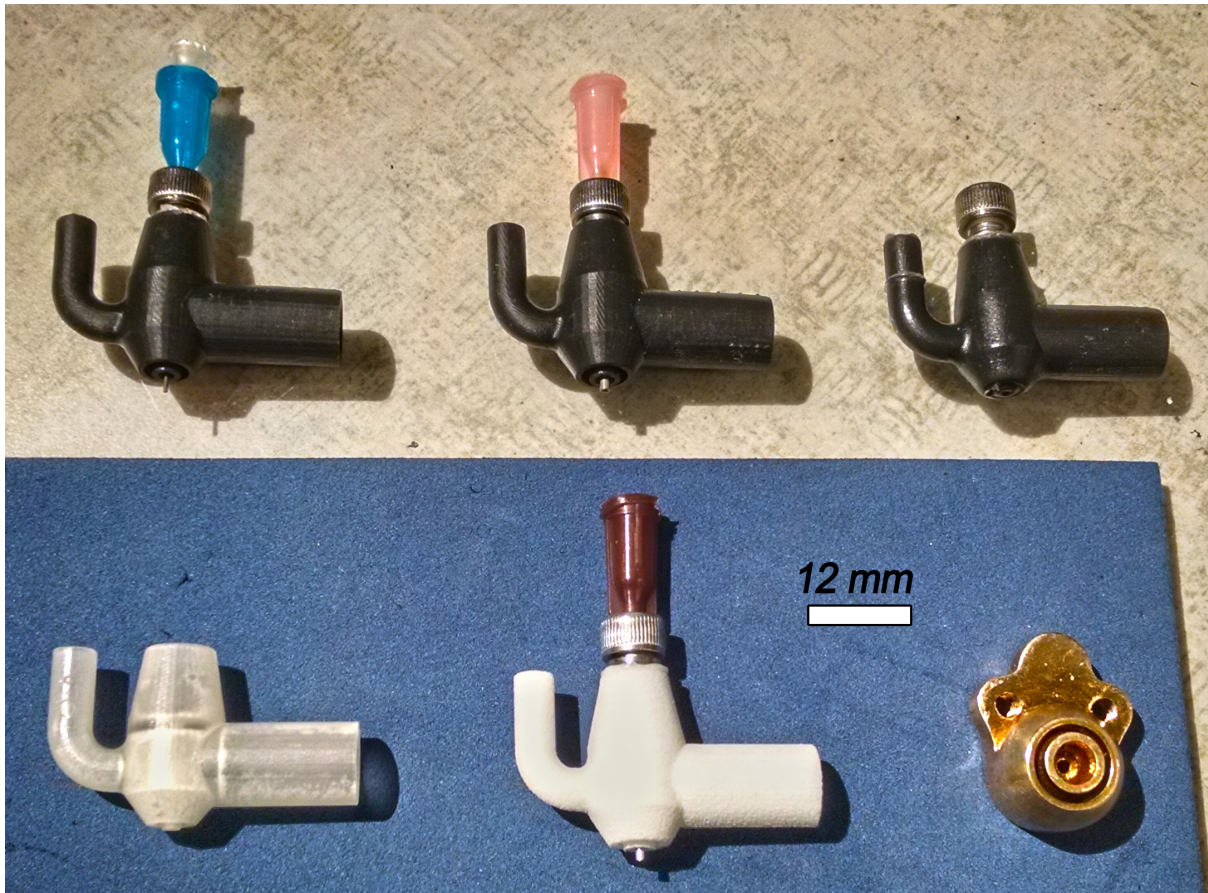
Photograph of the resin Nozzle 5 designs next to the brass nozzle in the lower right. The needle diameter and fluid outlet diameter vary among the prototypes.
